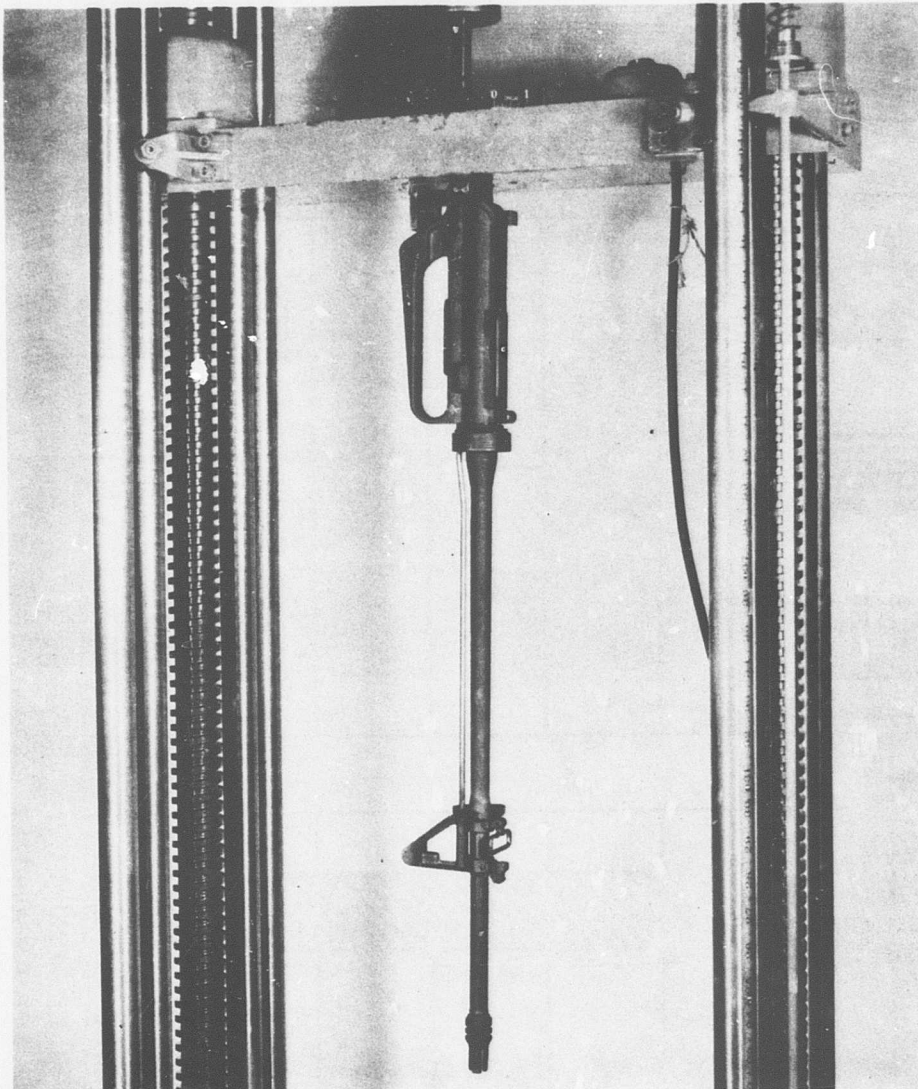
Testing Machine Setup for Application of Load to Charging Handle Latches.
